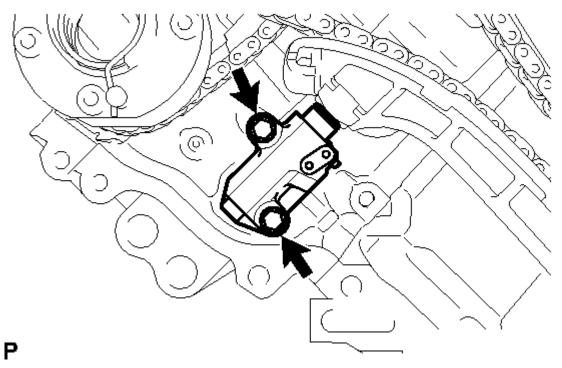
Identifying No. 1 Chain Tensioner Assembly RH & Bolts
